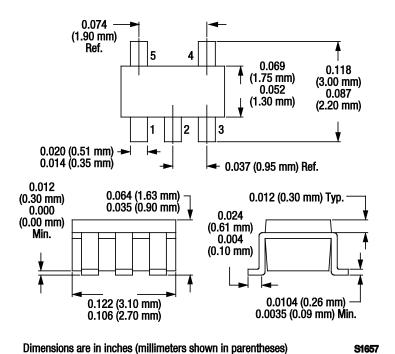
AA103-72/-72LF 5-Pin SOT-5 Package Dimensions
